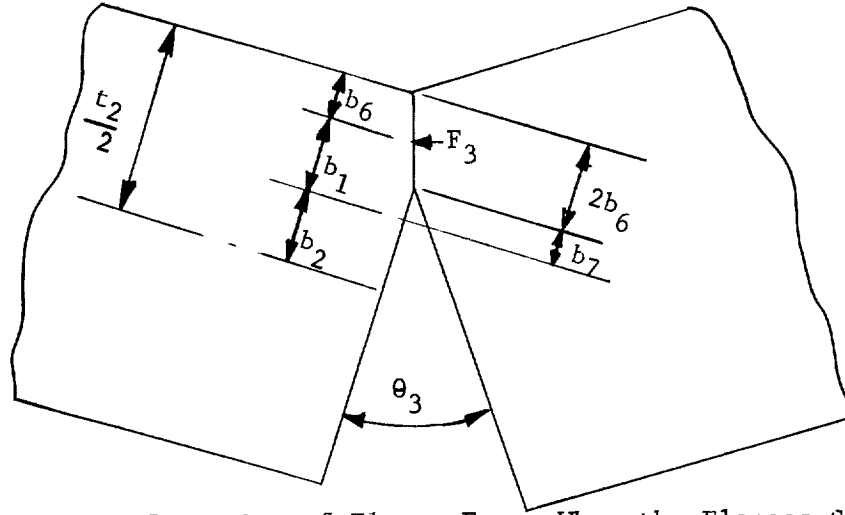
Plastic Deformation of Flange Faces When the Flanges Separate
